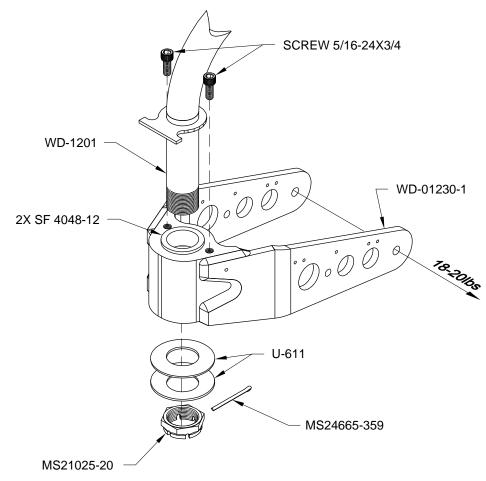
INSTALLING THE NOSE FORK ASSEMBLY
